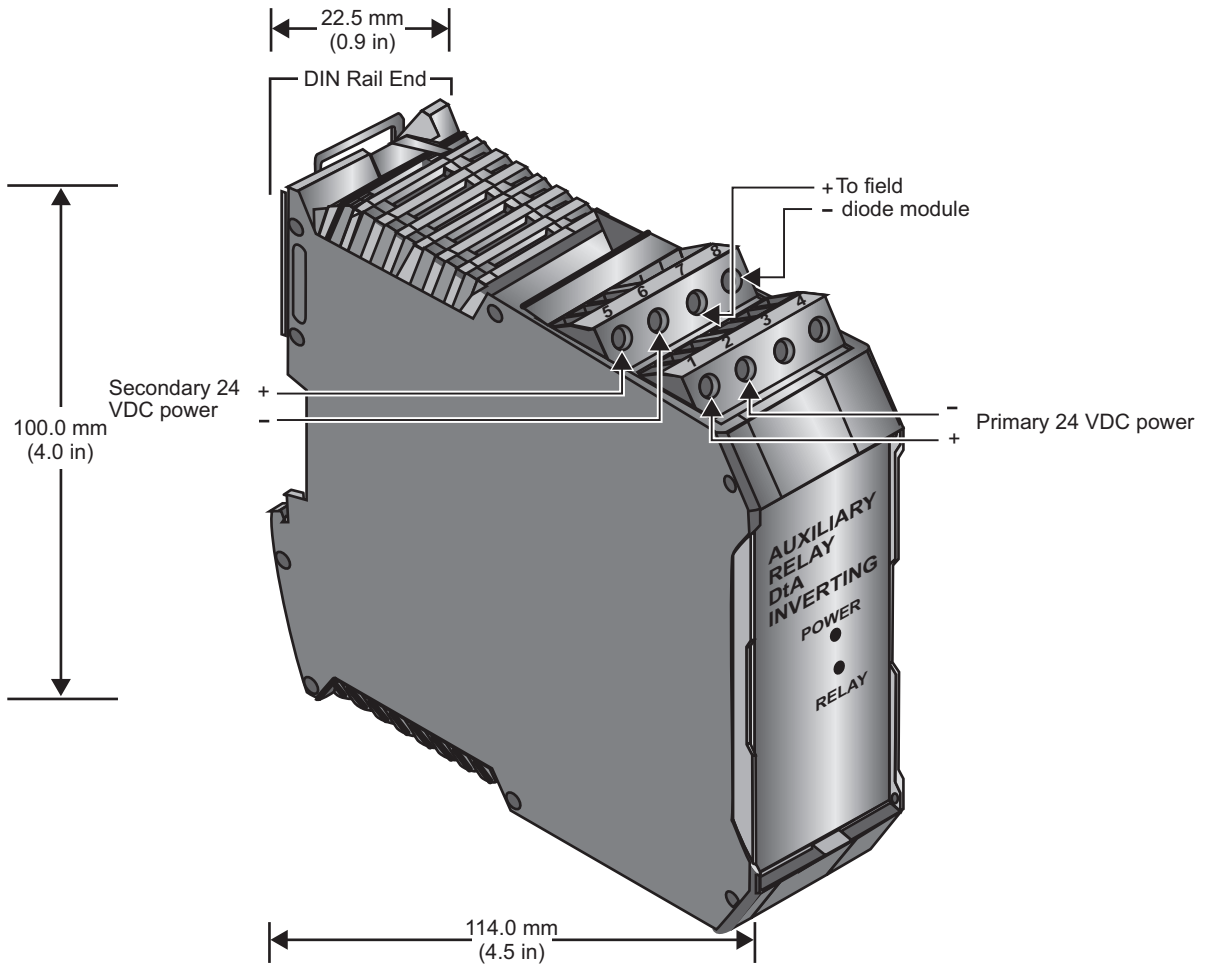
Auxiliary Relay DTA-Inverting Module Top View and Dimensions
